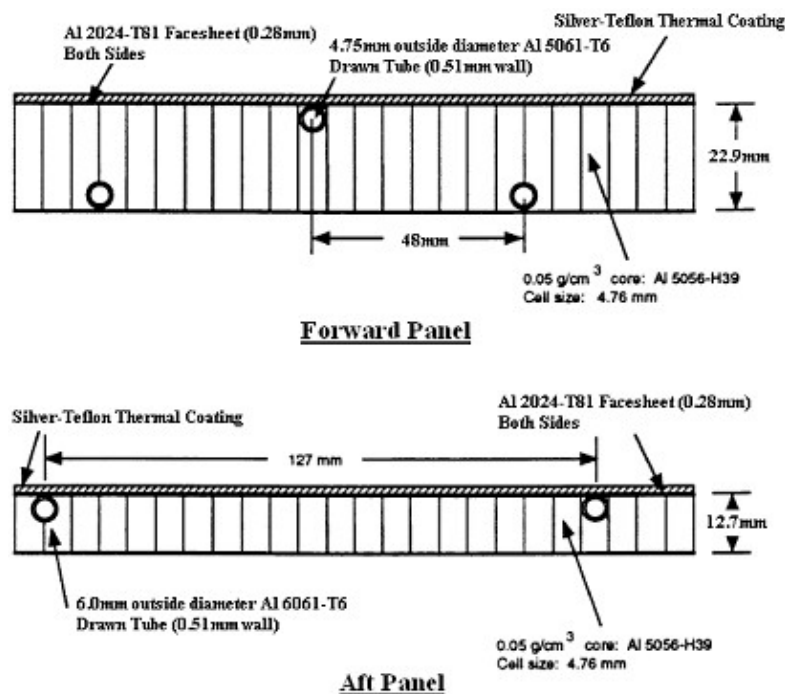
Cross-sectional diagram of forward and aft Orbiter radiator panels showing the Silver-Teflon coating, aluminum facesheet and honeycomb core (from Ref 2)
